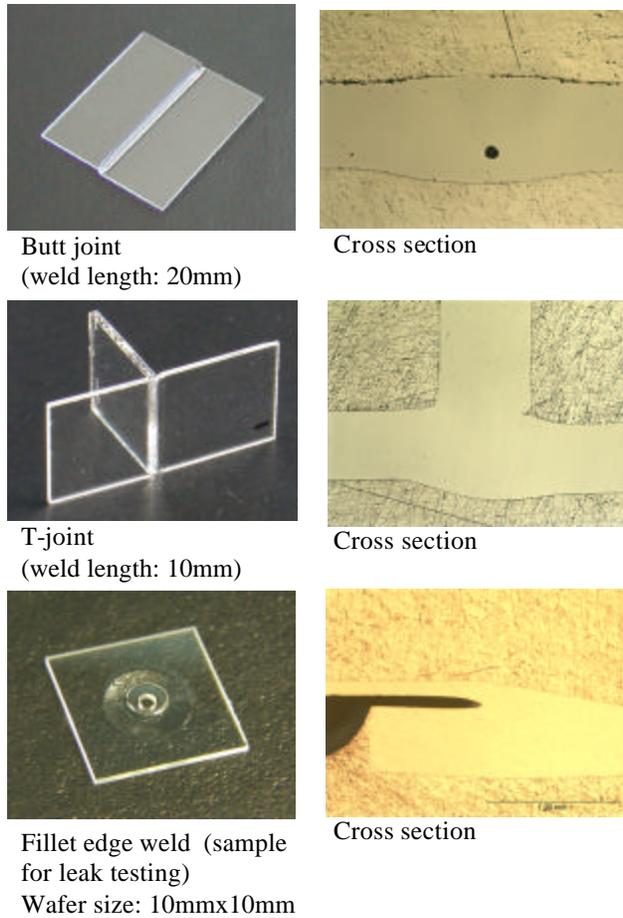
Laser welded glass samples (material: Pyrex 7740)
